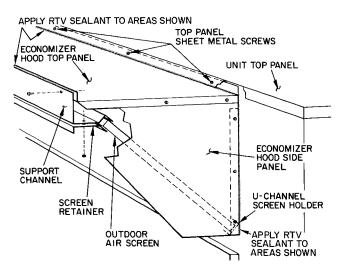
Economizer Outdoor Air Inlet Hood Assembly
